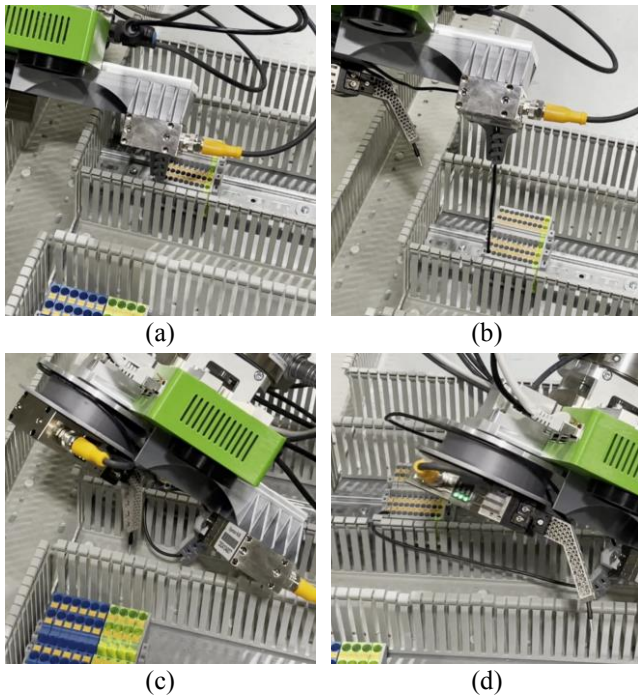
Assembly sequence of the wire. Firstly, the wire is mounted to the terminal block (a). Afterwards, the wire is routed into the wire duct (b) and (c). Inside the duct, the wire is routed to the next component (d).
